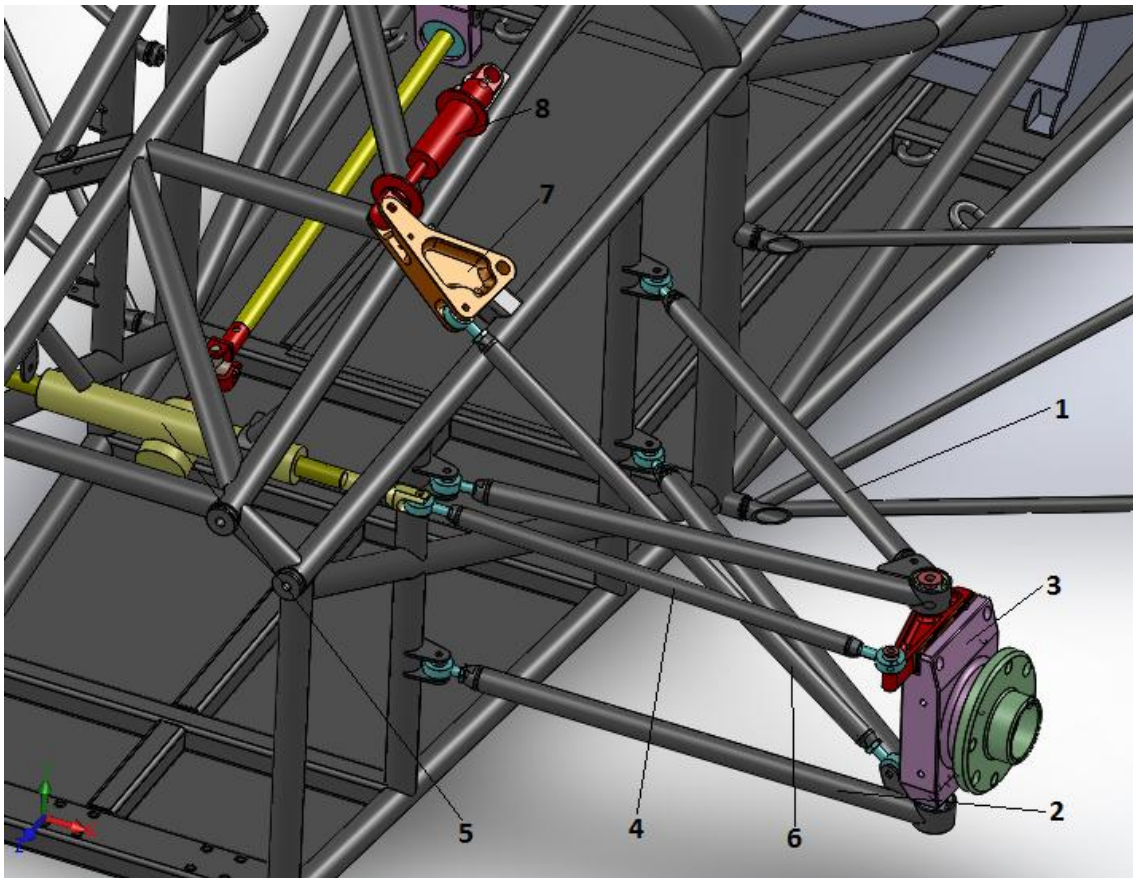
Short Long Arm suspension with push rod of analyzed vehicle. Control arms: upper – 1, lower – 2, upright – 3, steering rod – 4, steering rack – 5, push rod – 6, rocker – 7, shock absorber – 8.
